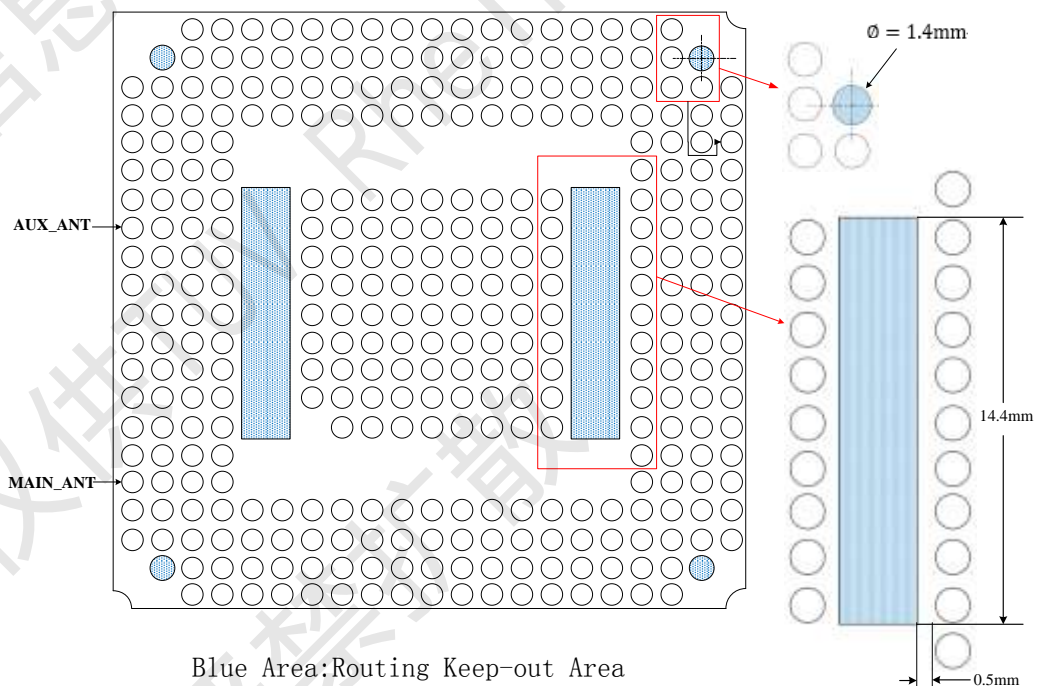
shows the recommended Routing Keep-out area design of PCB Layout (Top View).
